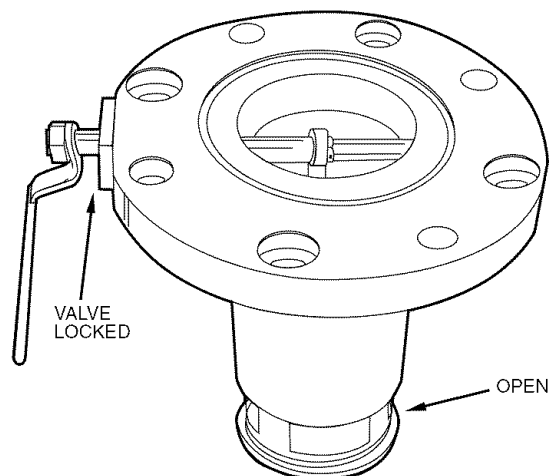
B — Suction Service Valve Locking Device, Open and Locked
